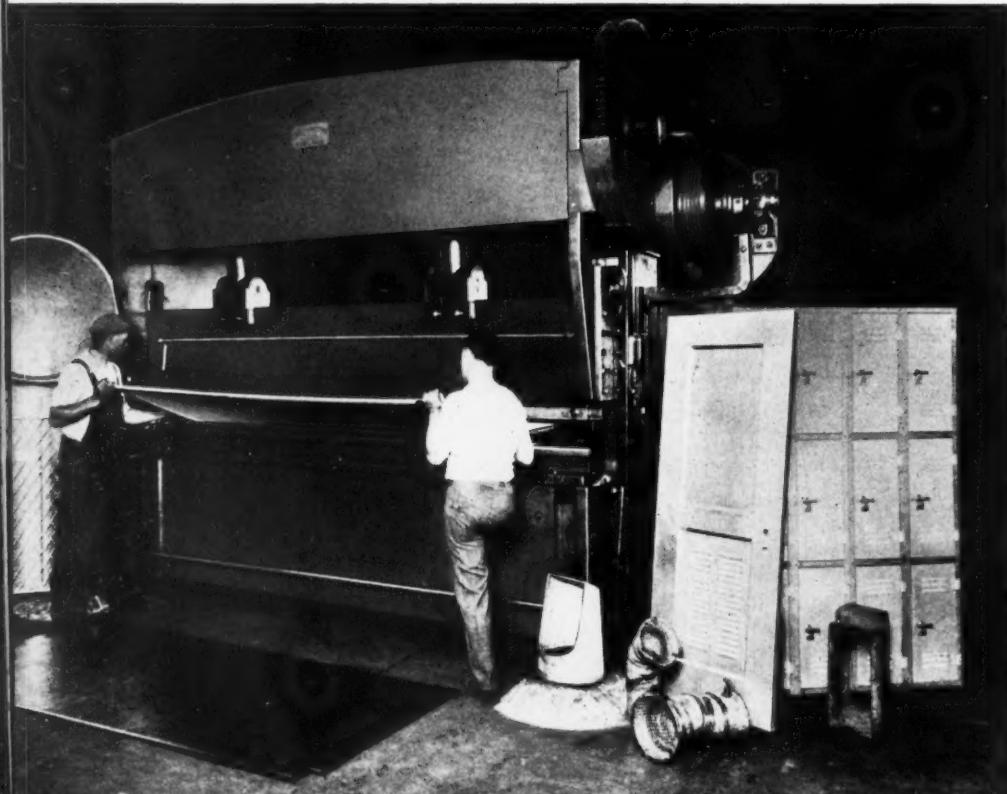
Press Brakes are Used for the Many Bending and Flanging Operations on Steel Sheets Used for Such Parts as Doors and Lockers
